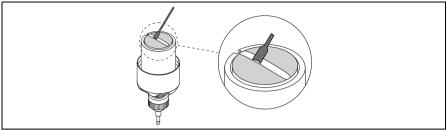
Coating the contact surfaces of the sensor with coupling fluid
